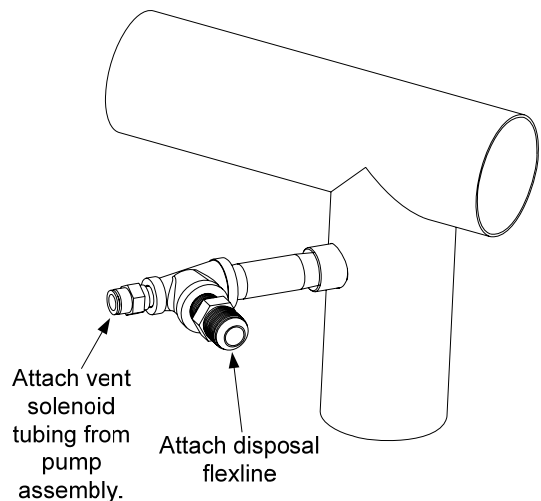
Attach new fitting assembly (108-4133) to drain dump.
